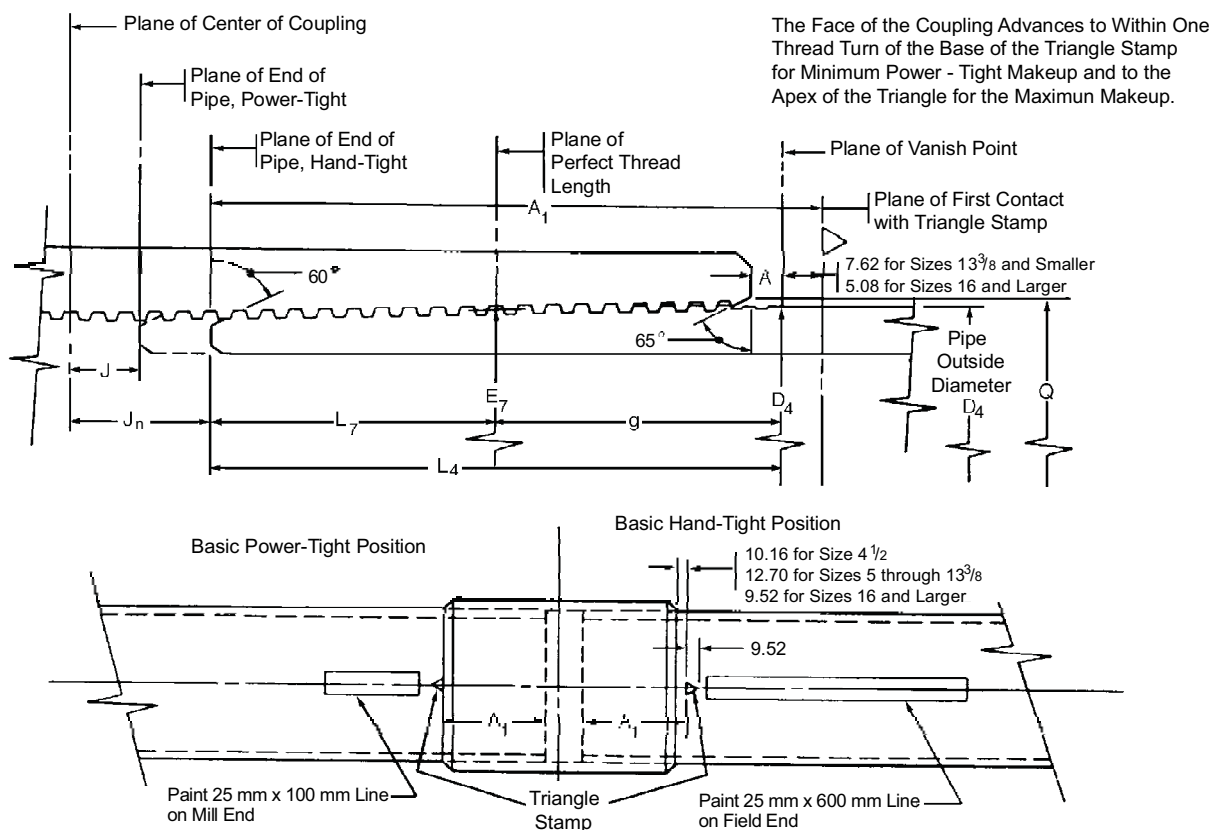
M—Basic Dimensions of Buttress Casing Threads Hand-Tight Make-Up
